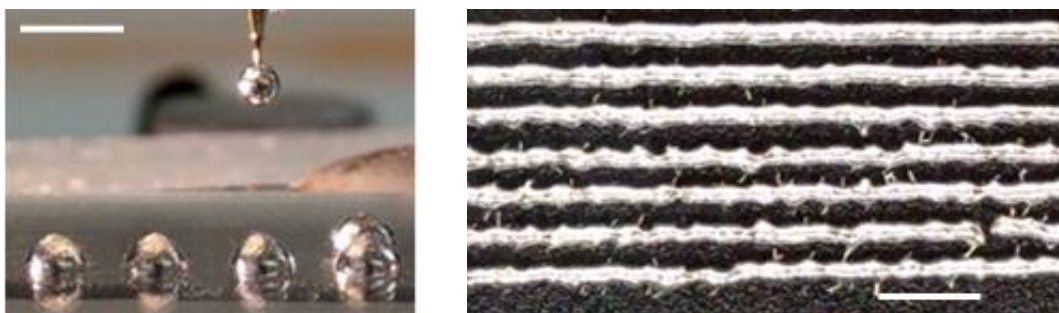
(a) large droplet of molten metal ink extruded under a pressure of 5 psi at the nozzle tip. (b) Optical image of the pneumatically extruded metal filaments at printing speed of 20, 25, 30, 35, 40, 45, 50mm/s respectively from top to bottom with a constant pressure of 10 psi. Scale bar: 5mm
